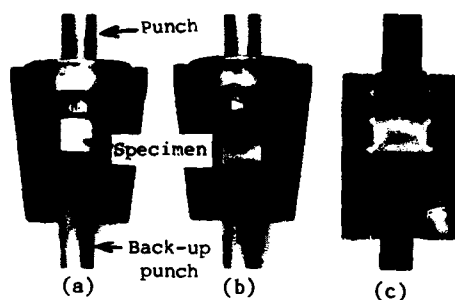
Cross sectional photographs during forming process, (a) before forming (b) screw die (c) fin die.
